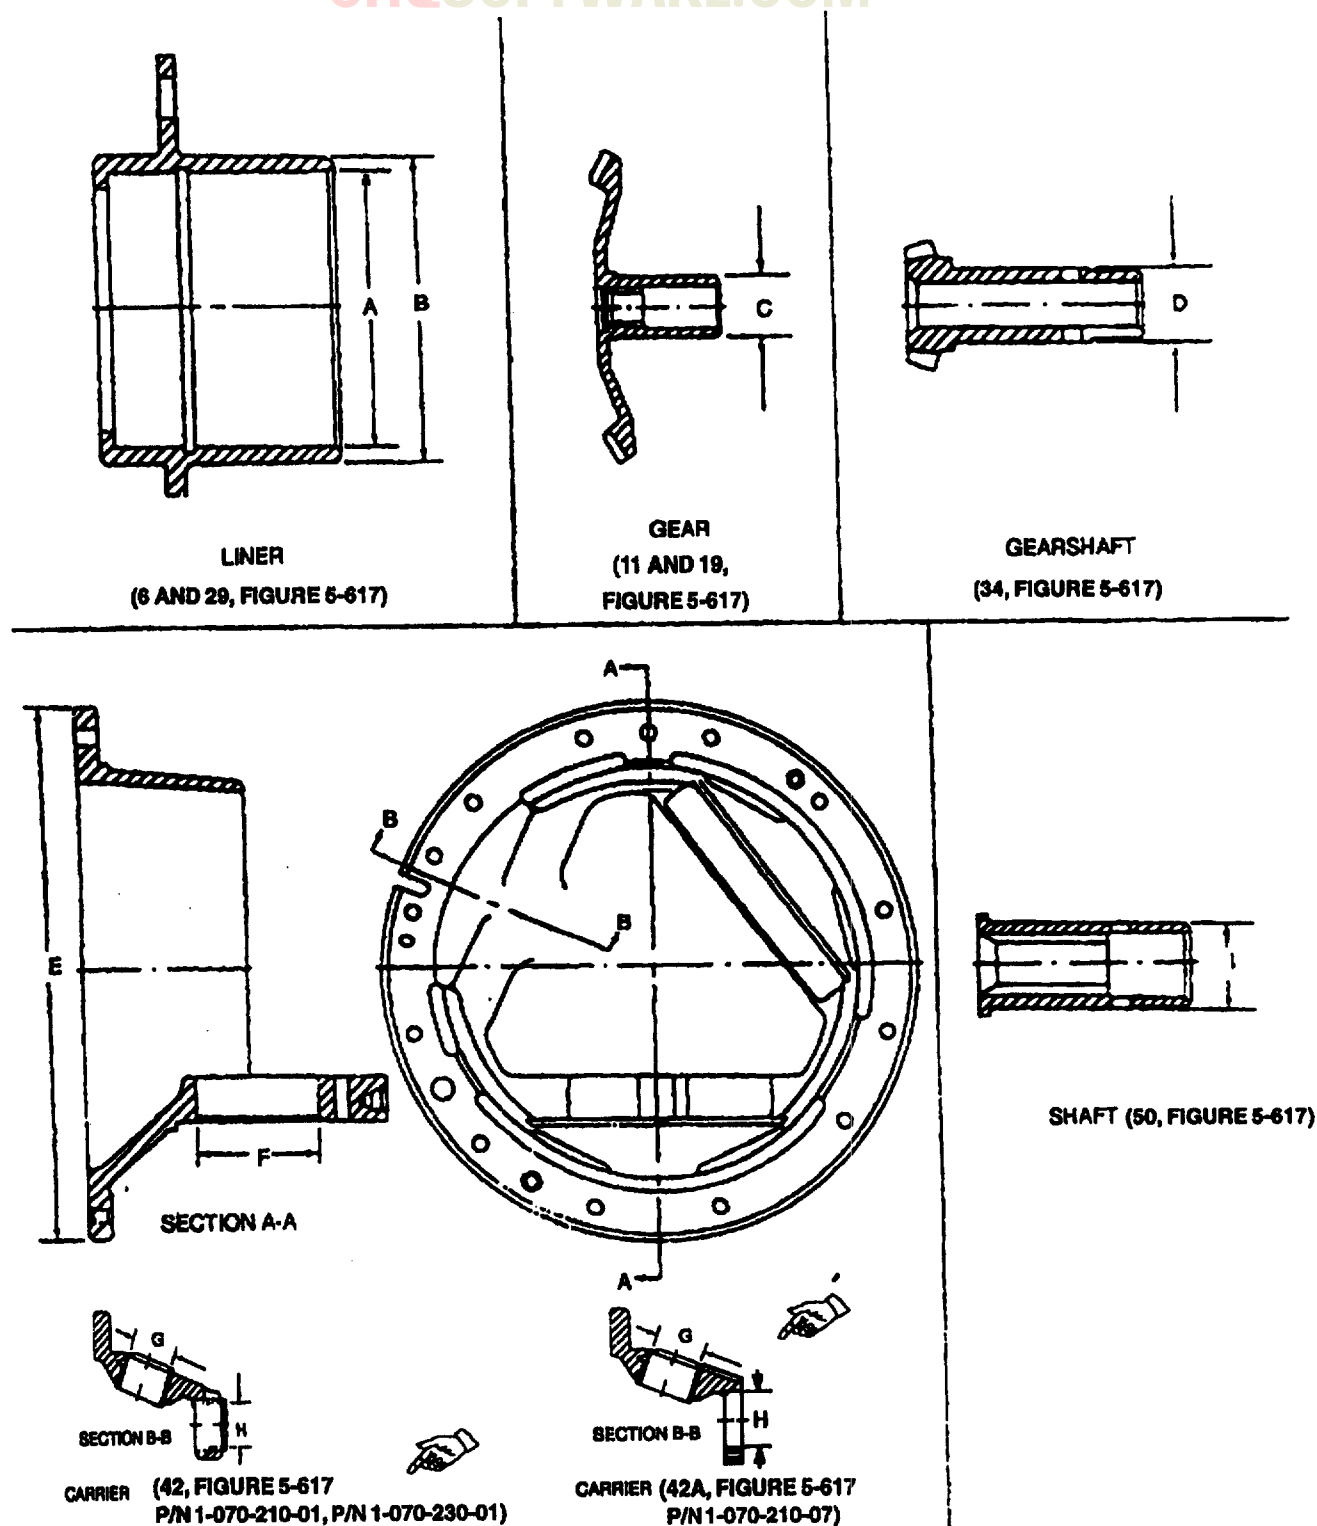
Accessory Drive Carrier Dimensional Inspection Locations.
